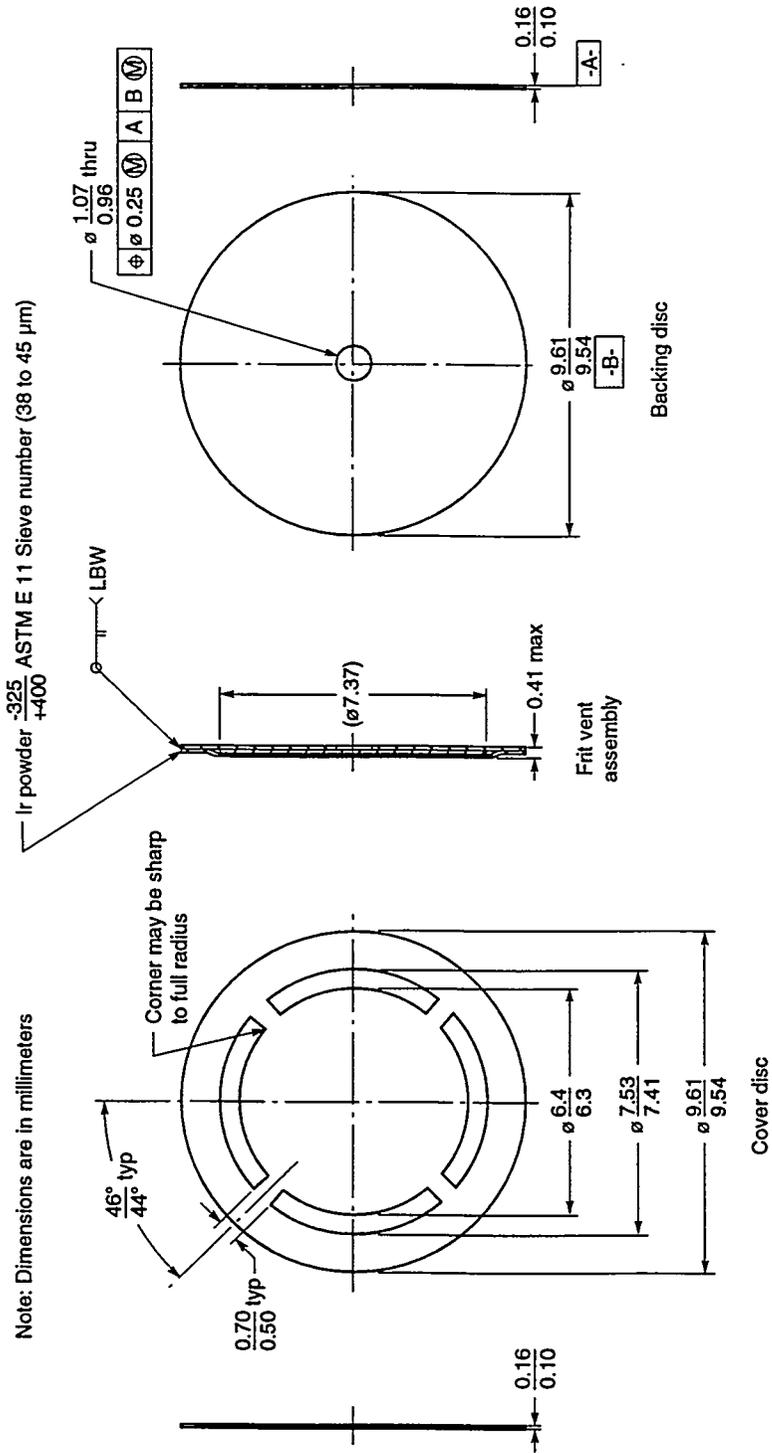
GPHS-RTG frit vent assembly drawing with cover disc and backing disc.
